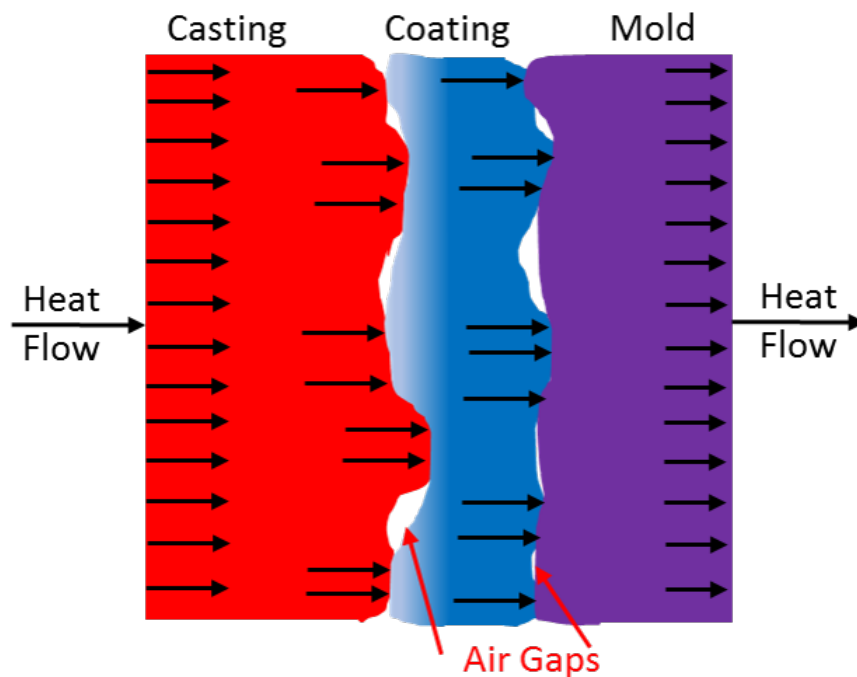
Heat flow from casting to mold through mold coating by point contact around air gaps [22].
